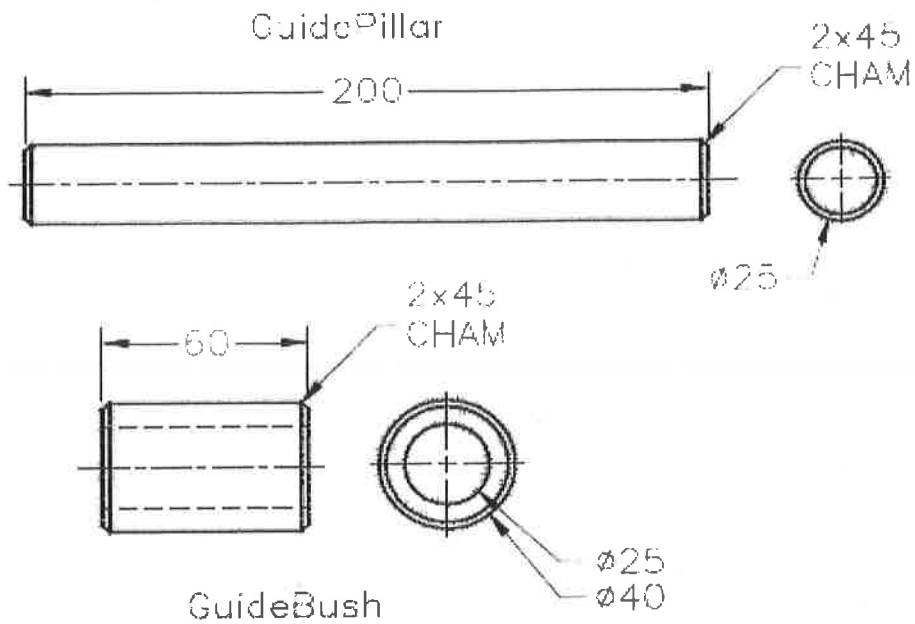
Dimensions and views of the Guide Pillar and Guide Bush
